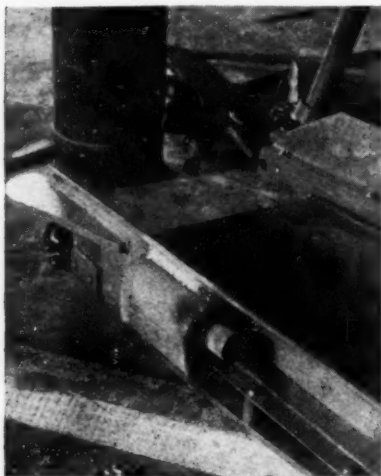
Light receptacle welded in place on rear conveyor of loader
